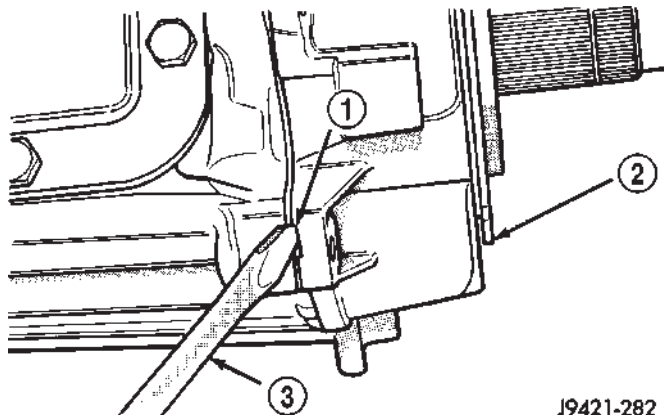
Loosening Rear Case (Breaking Sealer Bead)
